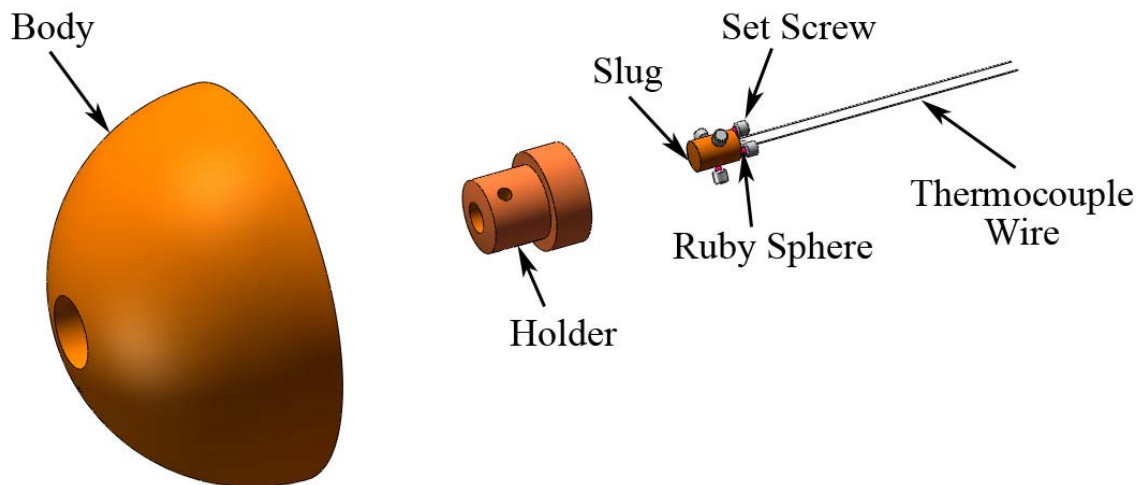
Assembly drawing of hemispherical slug calorimeter.
